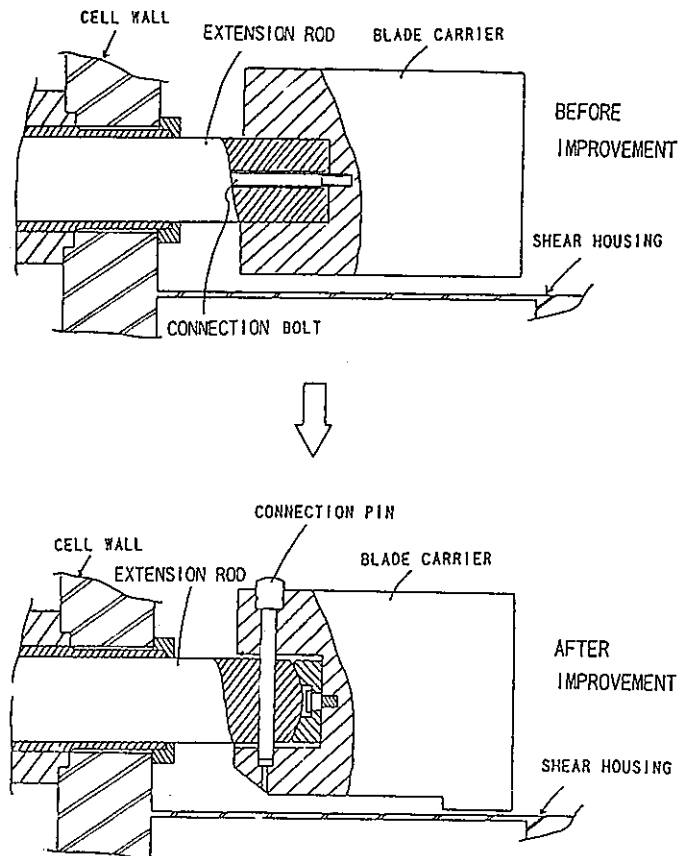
Improvement of Connection between the Extension Rod and the Blade Carrier.
